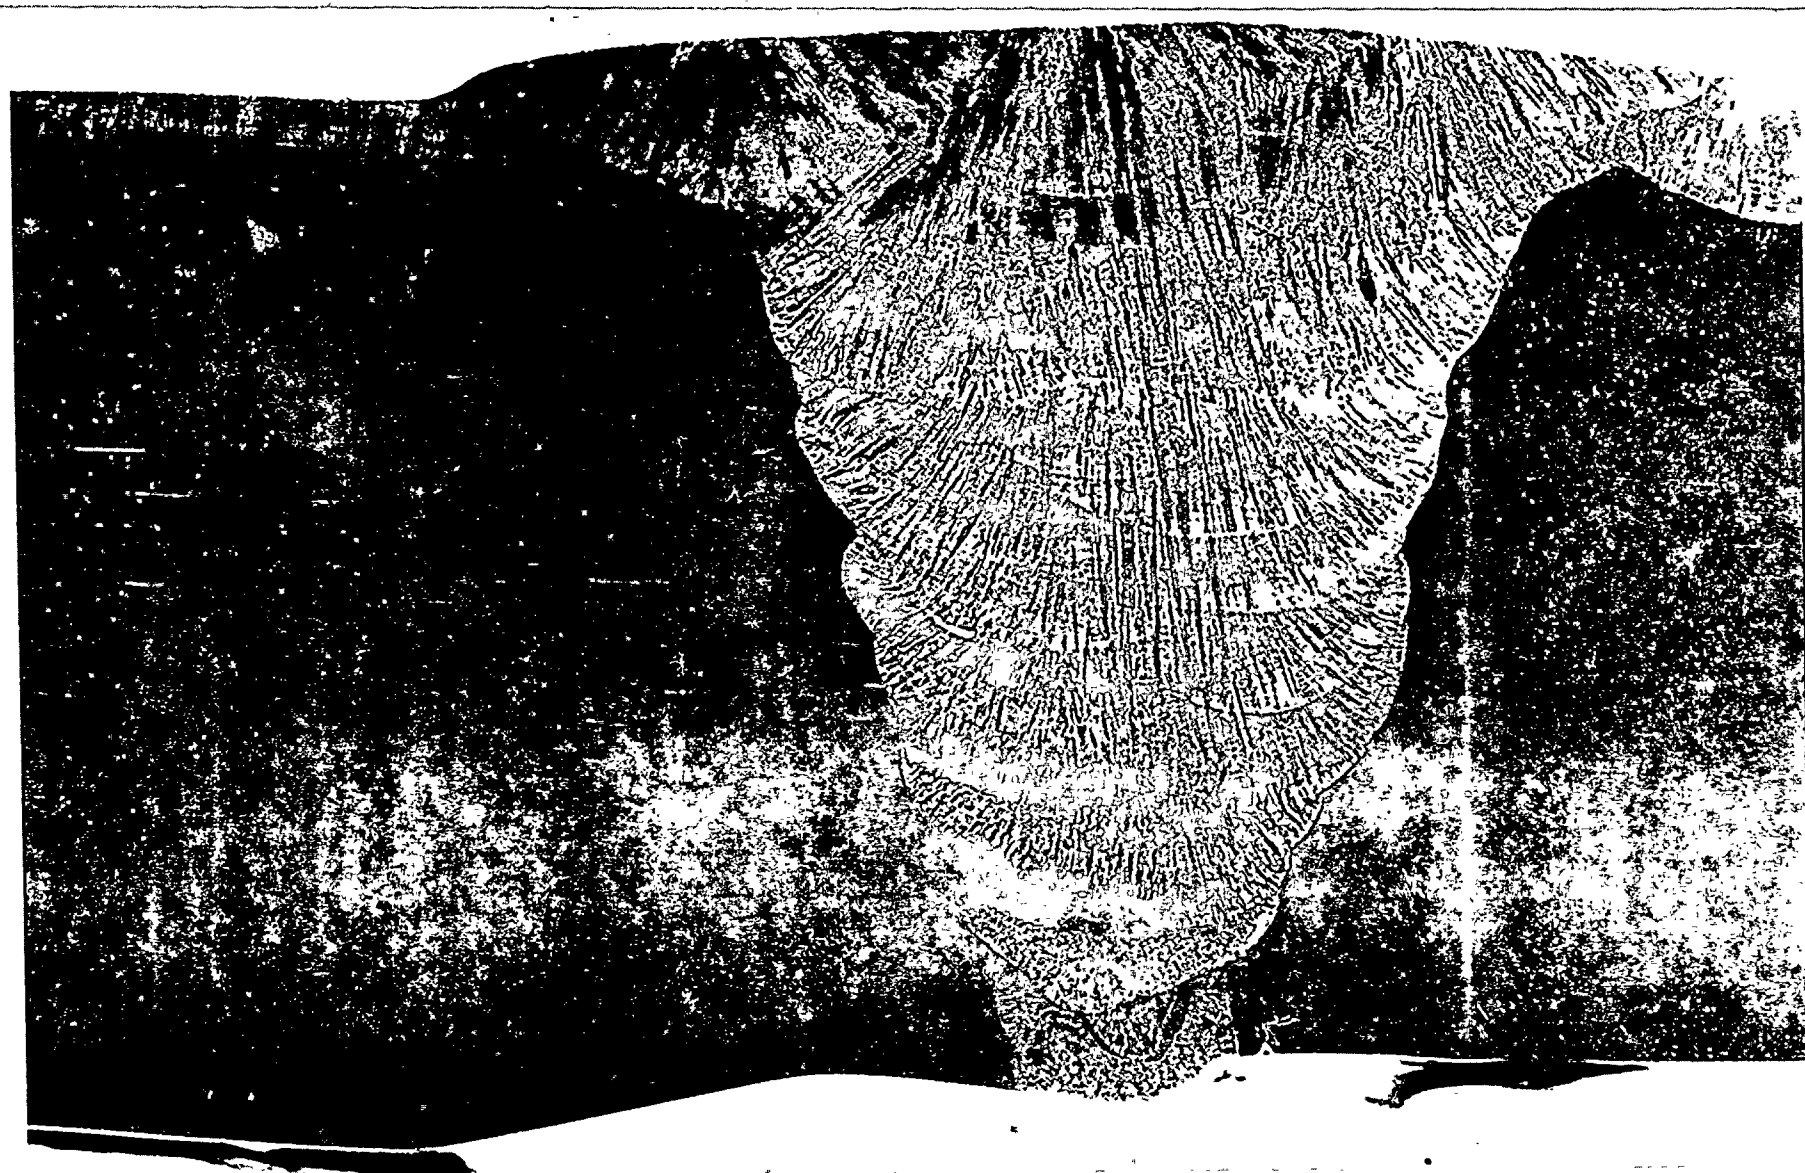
SAMPLE A4 SHOWING A CROSS-SECTION THROUGH THE SAFE-END-TO-ELBOW WELD. NO CRACKS WERE OBSERVED IN THIS SAMPLE.
